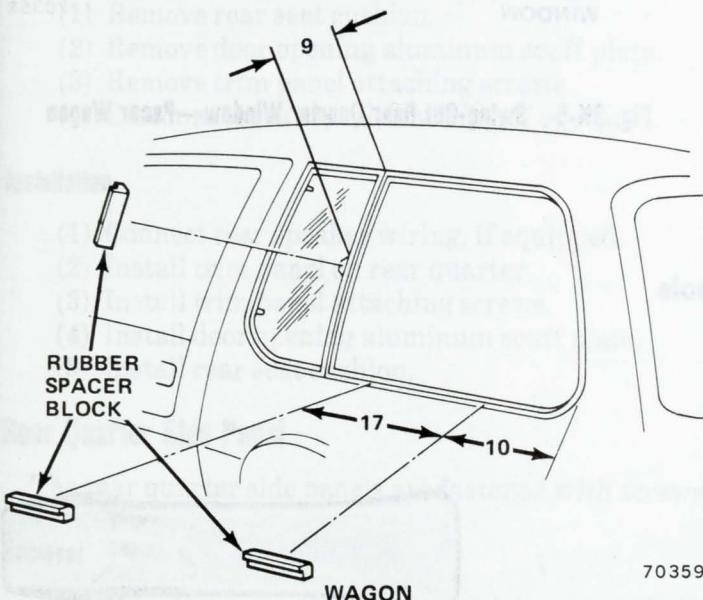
K-4 Installation of Rubber Spacer Blocks—Pacer (Inches)
